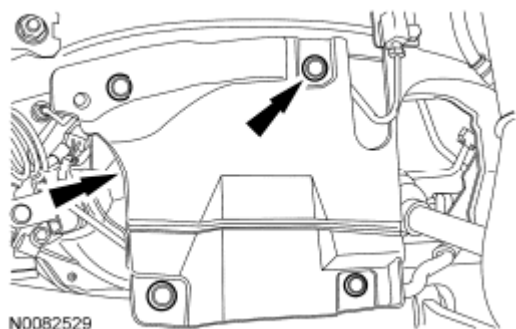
Locating Pin-Type Retainers & RH Splash Shield
